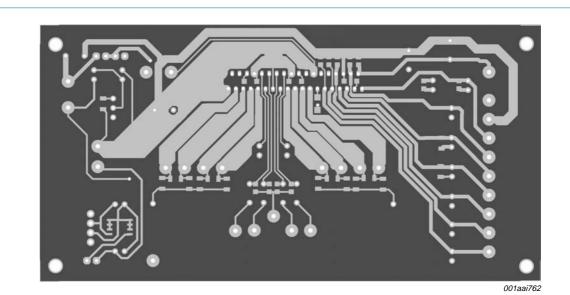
Printed-circuit board layout of test and application circuit showing bottom copper layer viewed from top
